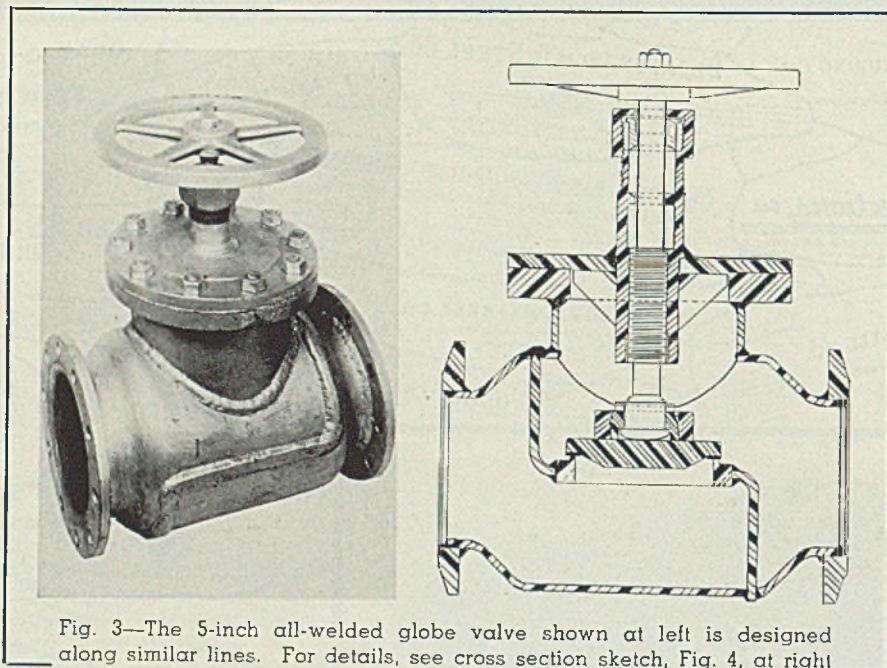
The 5-inch all-welded globe valve shown at left is designed along similar lines. For details, see cross section sketch, Fig. 4, at right
